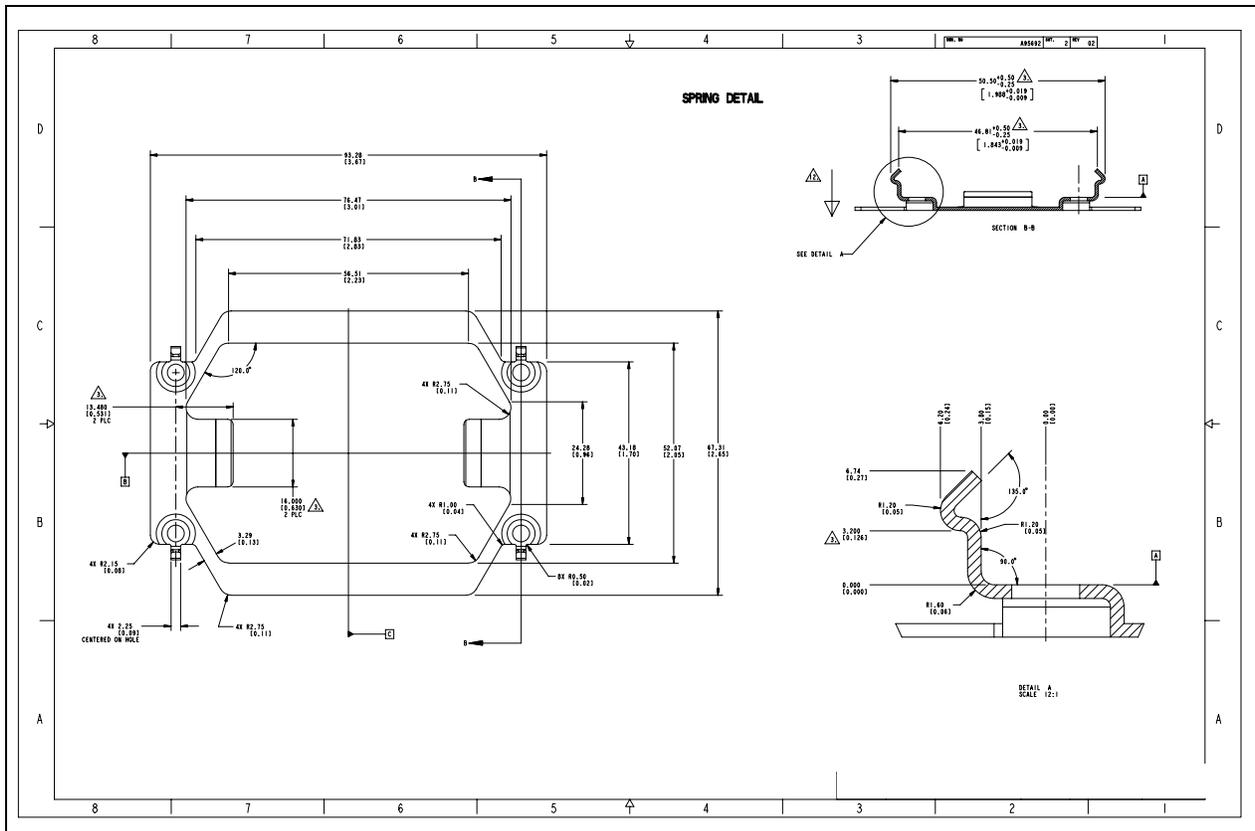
Cooling Solution Hat Spring (Sheet 3 of 3)
